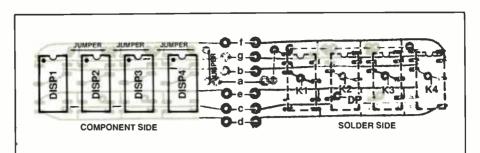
Wiring guides for display board: left shows how displays and jumper wires install on component side; right shows points to which connections are made with holes in main board that have the same legends.
